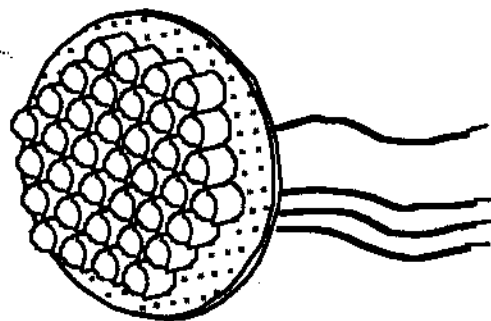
An array of 37 LEDs soldered onto a pre-perforated circuit board, ready for mounting into a headlamp body.
